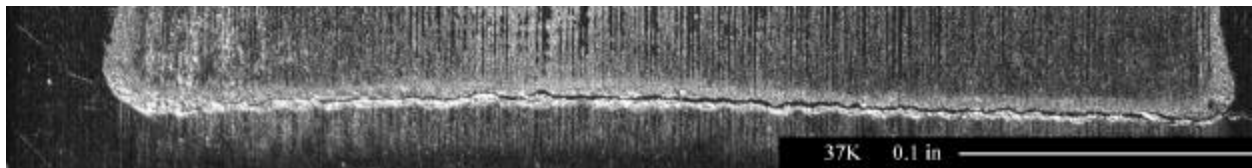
Photograph of a specimen after 37000 cycles of bending test, following a fretting-fatigue run-out.
